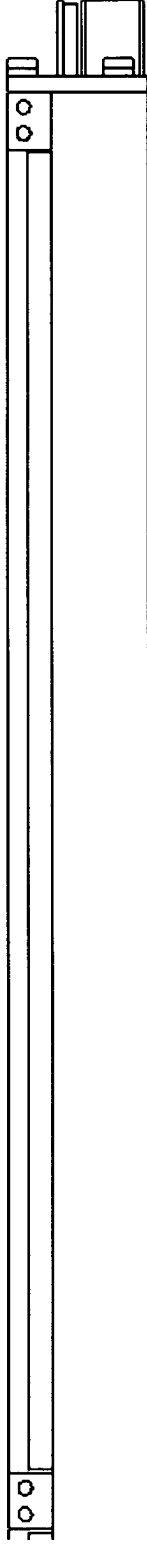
A: Front view of the left end of a floor frame (40 foot collapsible cargo container)
